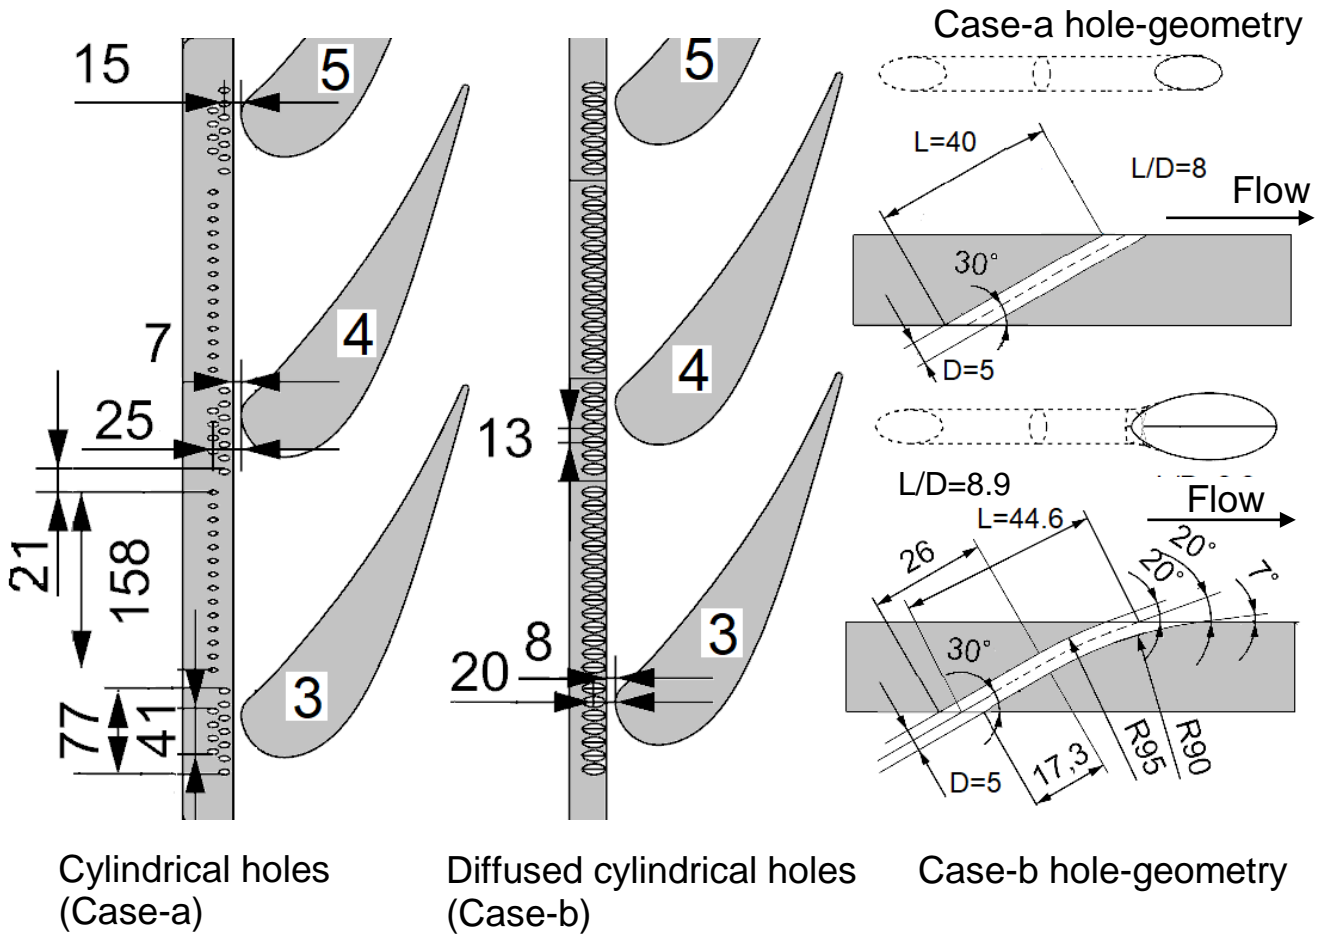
Two film-cooling hole geometries and arrangements in the film cooling plate: Case-a (Cylindrical holes) and Case-b (Diffused cylindrical holes). All dimensions shown are in mm.
